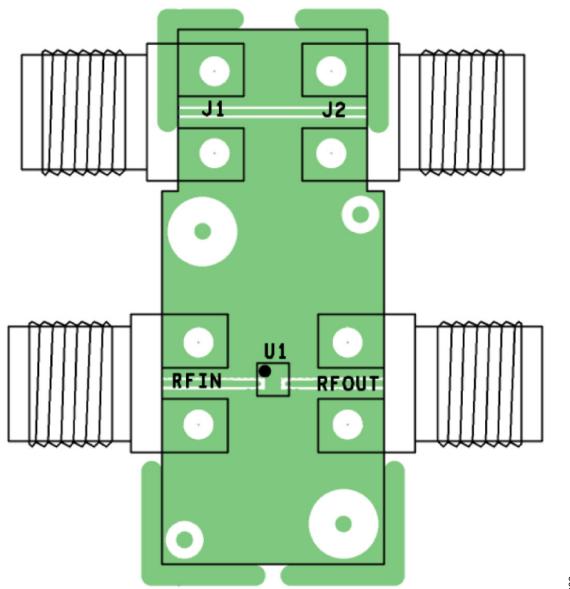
ADL8201-EVALZ Assembly Drawing (J1 and J2 Are Not Installed)
